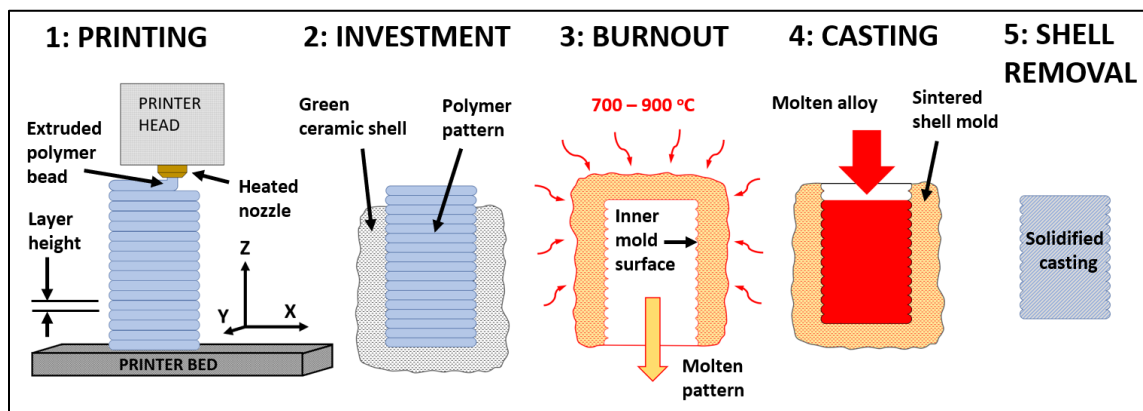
Rapid Investment Casting process: (1) 3D printing of the pattern; (2) shell building process with ceramic shell slurry and stucco; (3) pattern burnout and shell sintering; (4) casting of the alloy; (5) shell removal.
